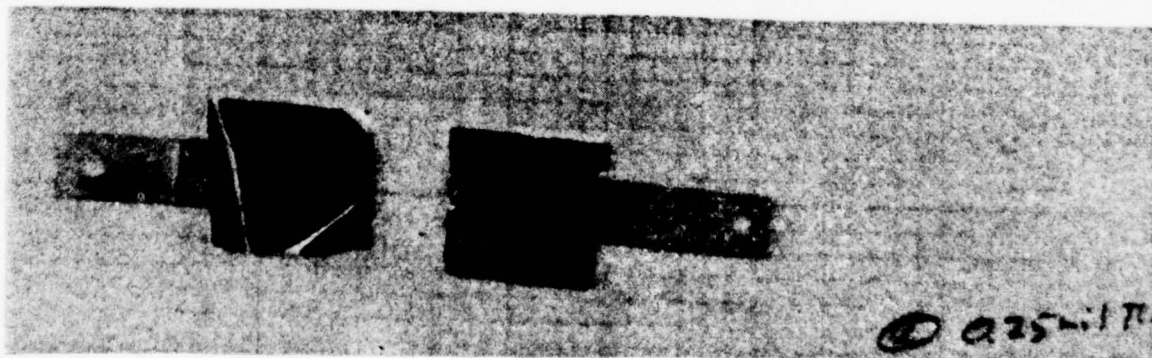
Fractured Composite Specimen Using Internal Clamped Fixtures
